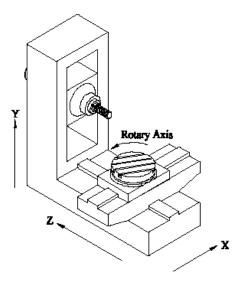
Four Axis Machining Center (3 Linear and 1 Rotary Axes)
